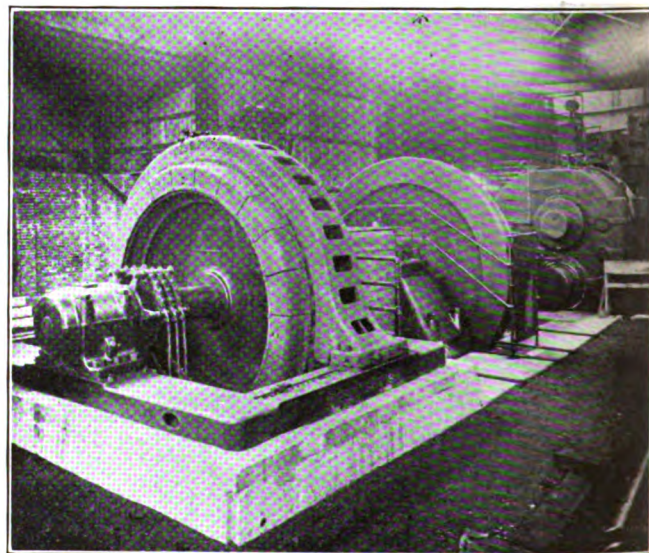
Motor end of new 100-in. plate mill showing flywheel and United reduction gear.
